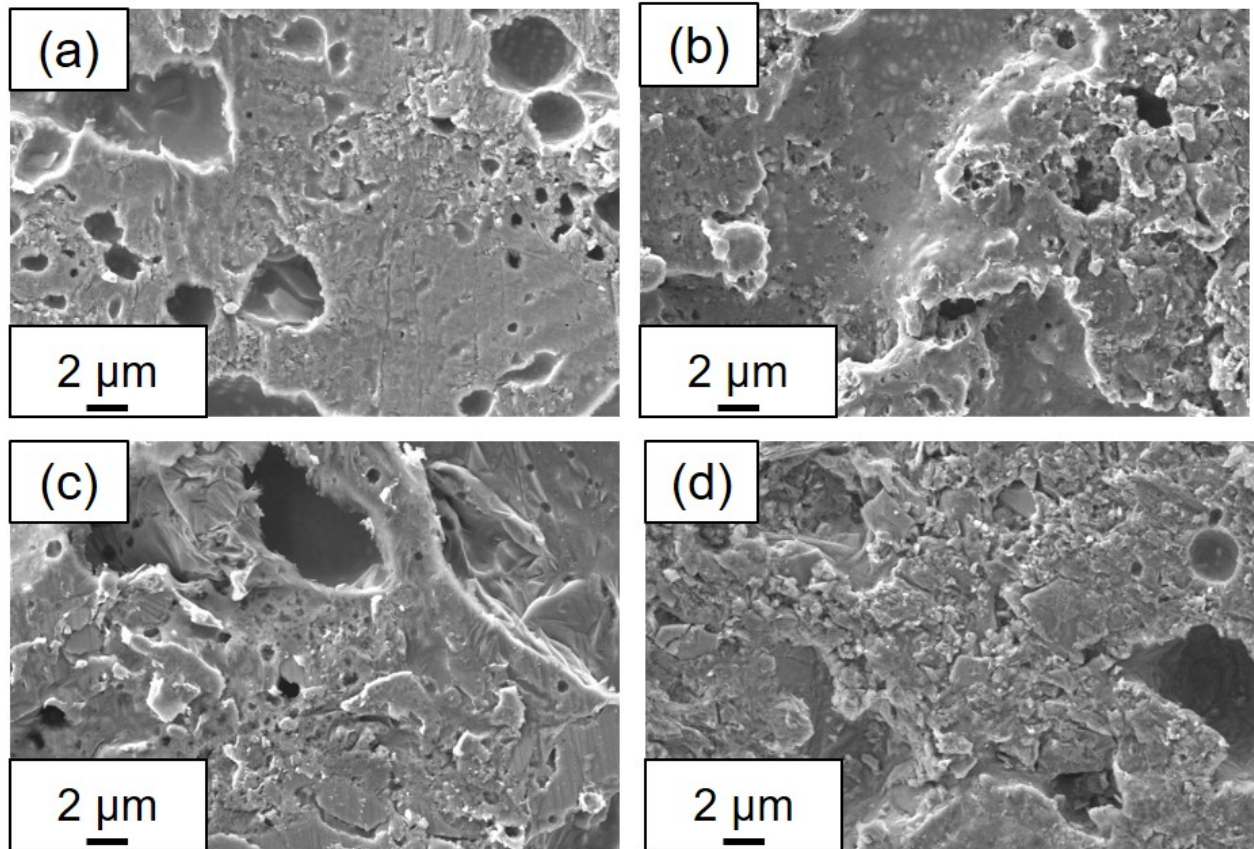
Fracture surfaces of RMF-brazed joints, with an RMF thickness of (a) 66 μm , (b) 99 μm , (c) 132 μm , and (d) 165 μm .
